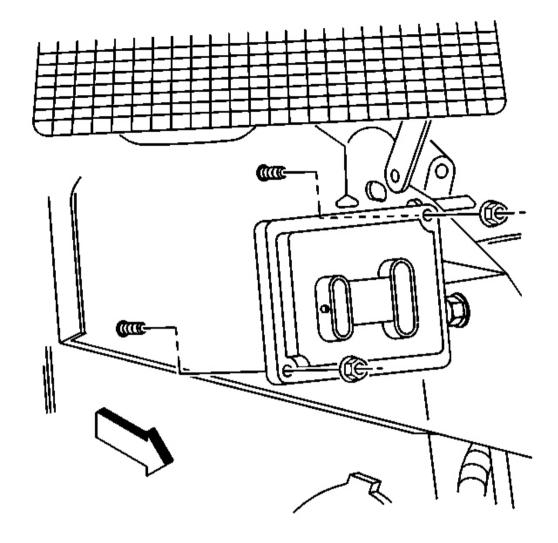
Nuts Mounting The Module To Headlamp Bracket Courtesy of GENERAL MOTORS CORP.
